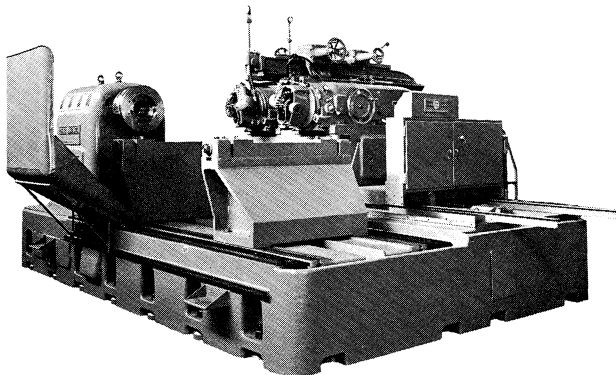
Model GCK-96 in. shaver whose two cutter heads permit shaving both sides of a herringbone gear.
